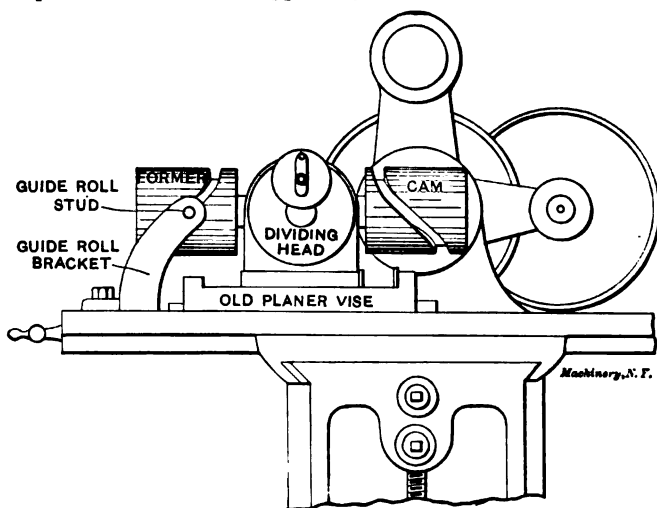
Cutting a Cylindrical Cam with the Attachment shown in Fig. 34
